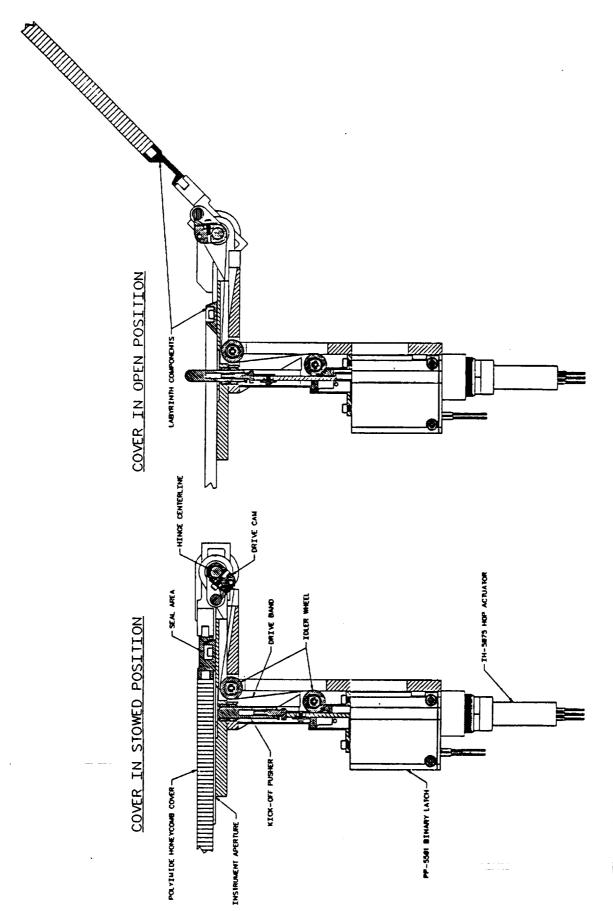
Partial cross section of cover, seal, and drive mechanism for Clementine sensor cover system.
